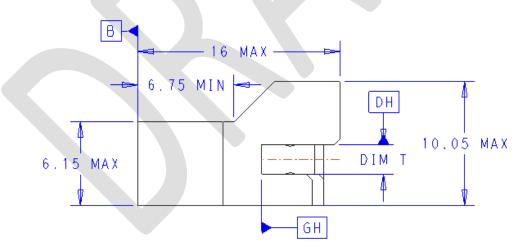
1C, 2C, 4C AND 4C+ STRADDLE MOUNT CONNECTOR PROFILE DIMENSIONS (MM)
